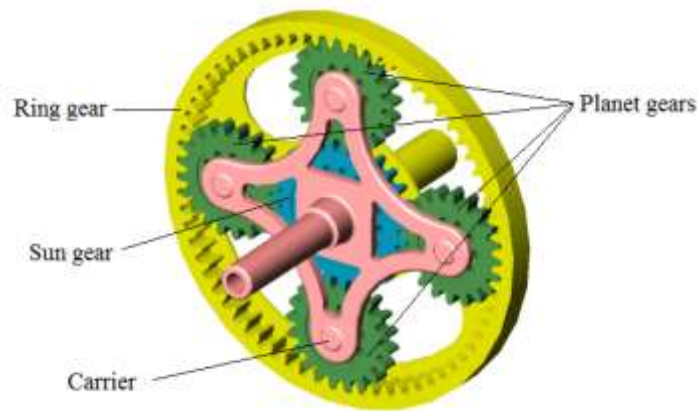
Structure of a planetary gear set with 4 planet gears [8]
